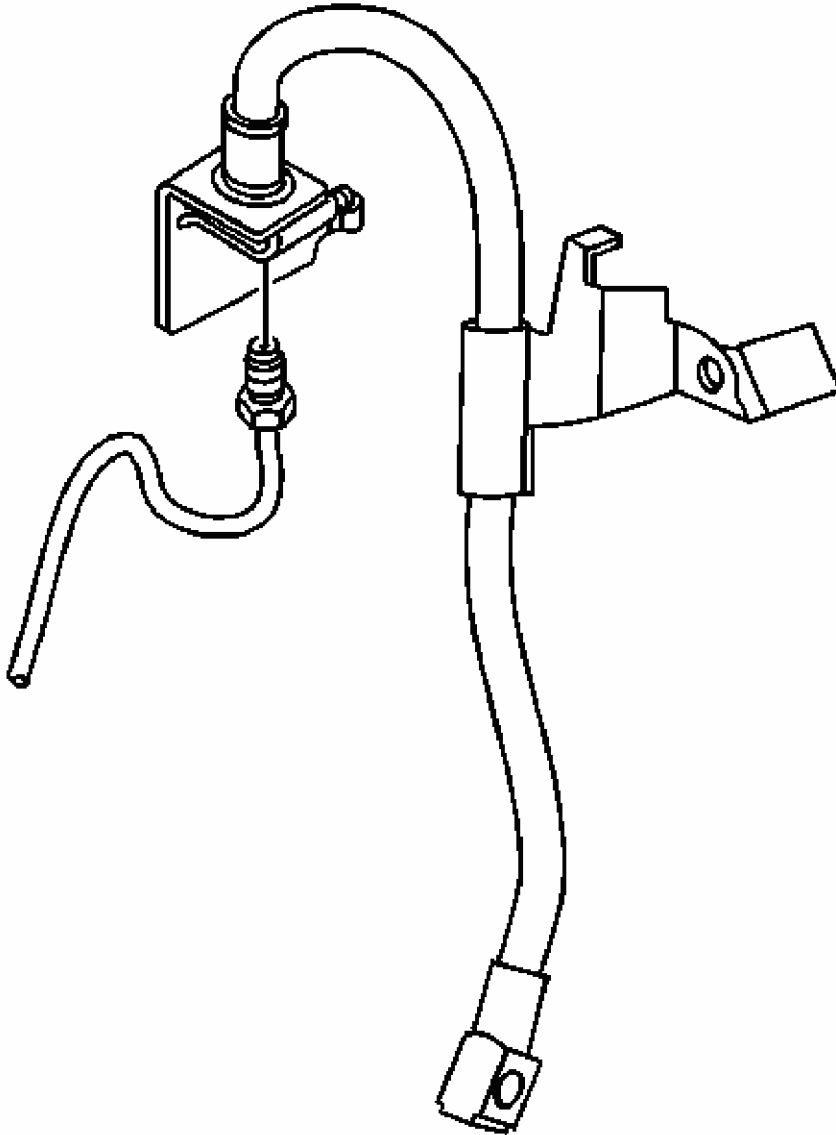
Removing/Installing Brake Pipe Fitting To/From Brake Hose
